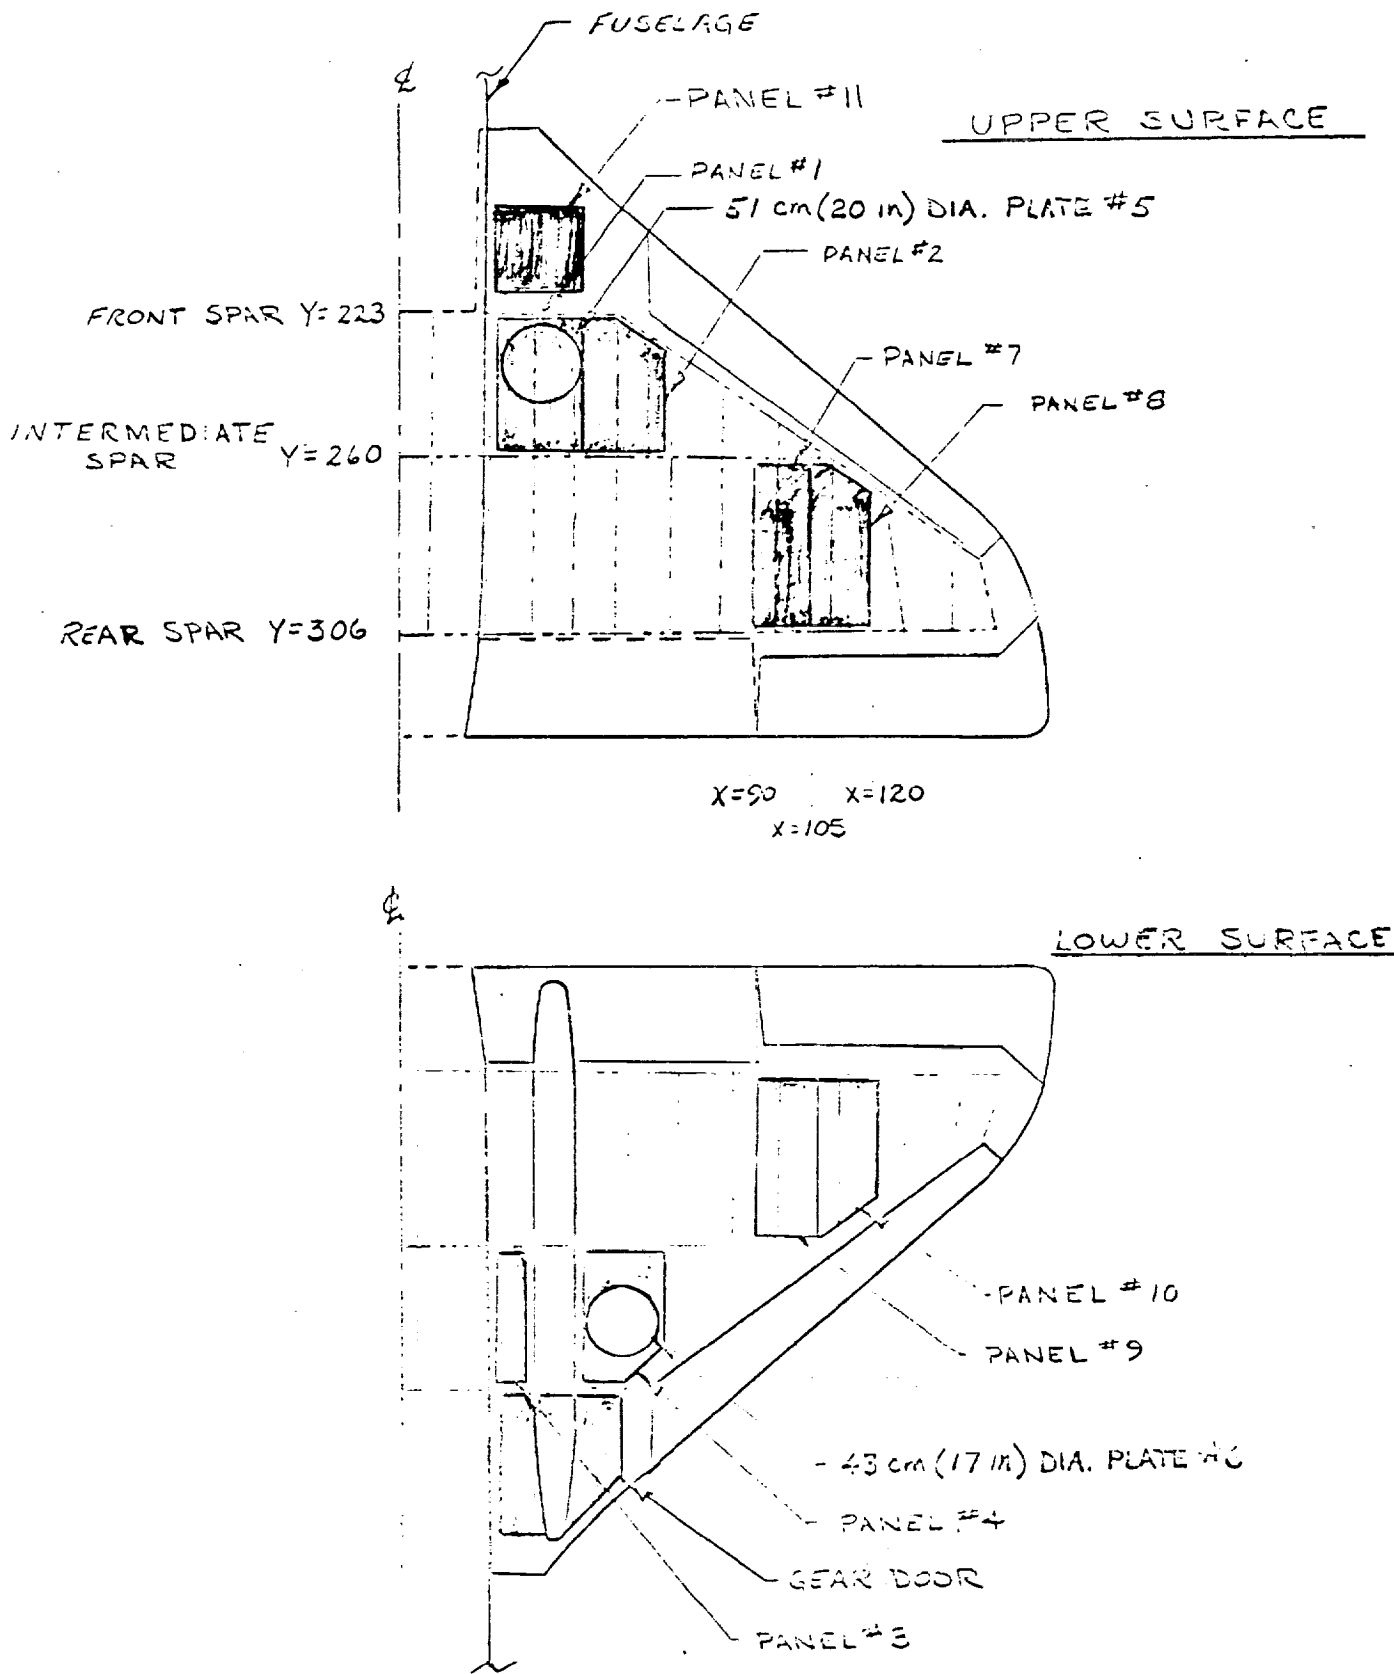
HOLE CONFIGURATION #14. ALL PLATES & PANELS REMOVED;
